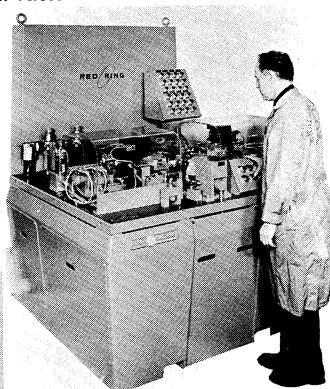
A semi-automatic inspection machine that simultaneously checks four gears on a transmission cluster for size, eccentricity and nicks at 200 per hour. Indicator lights show errors.
